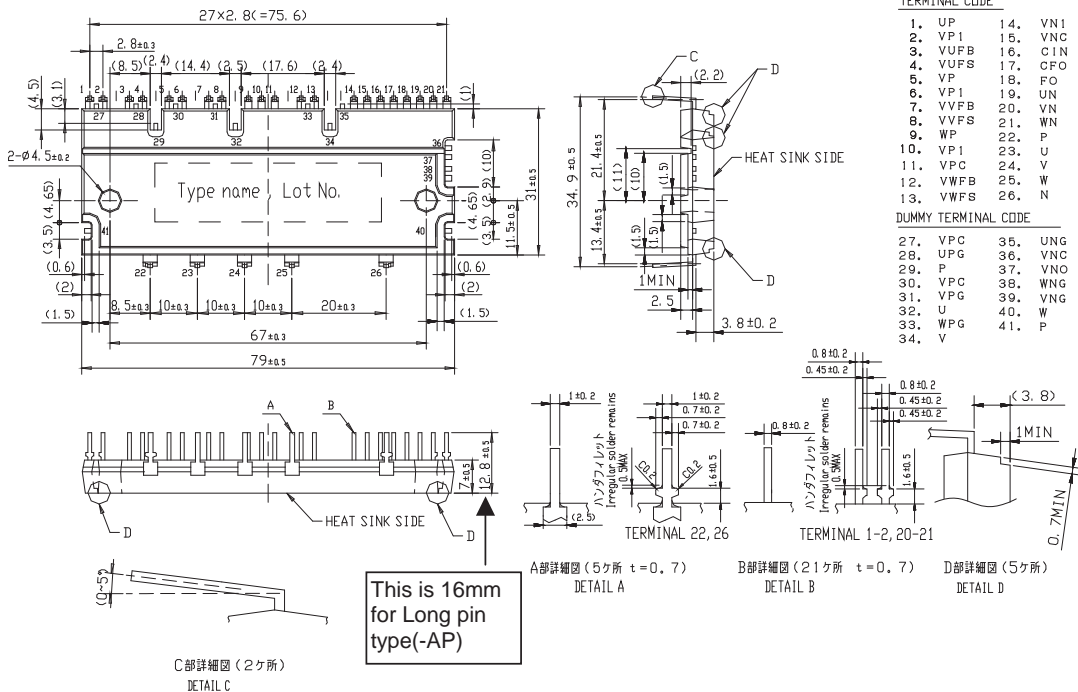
Package outline drawing of Large DIIPM Ver.3(PS2186X-P)
